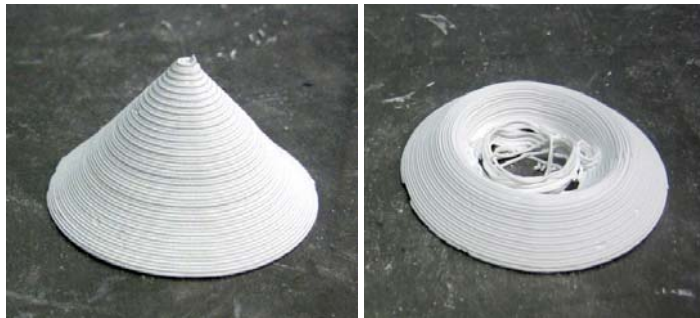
A successfully built cone (left) and a collapsed cone (right).
